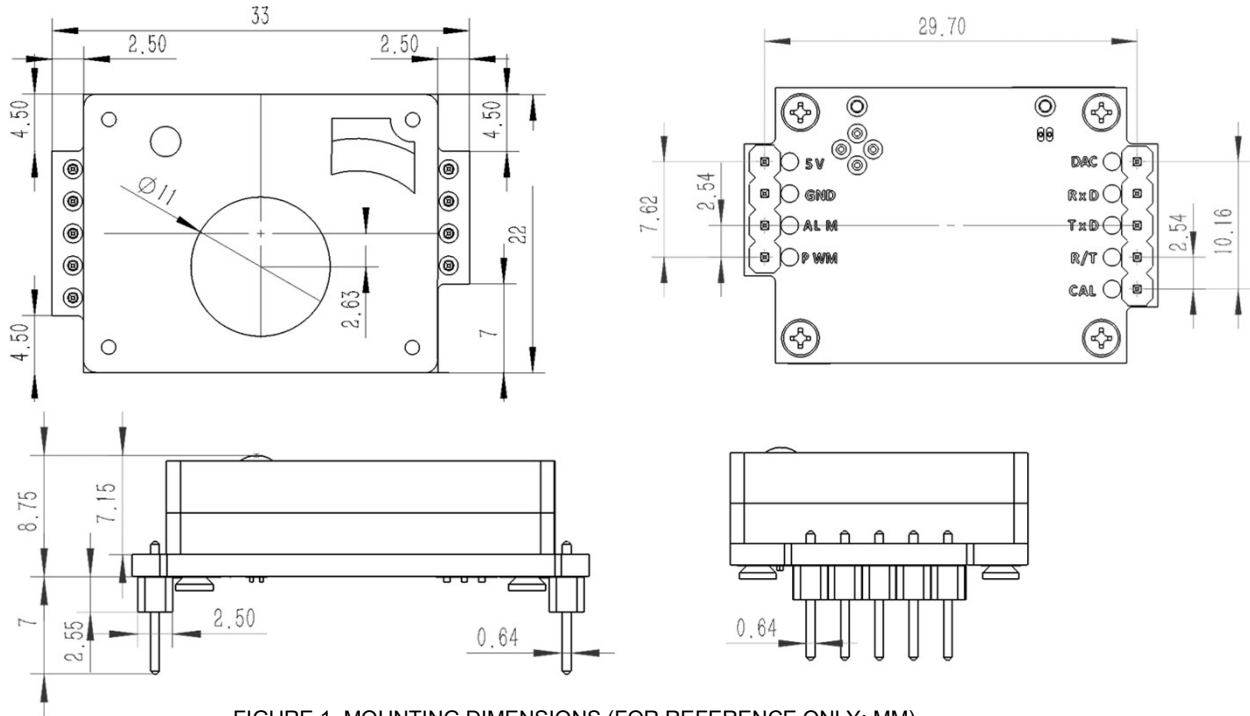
MOUNTING DIMENSIONS (FOR REFERENCE ONLY: MM)
